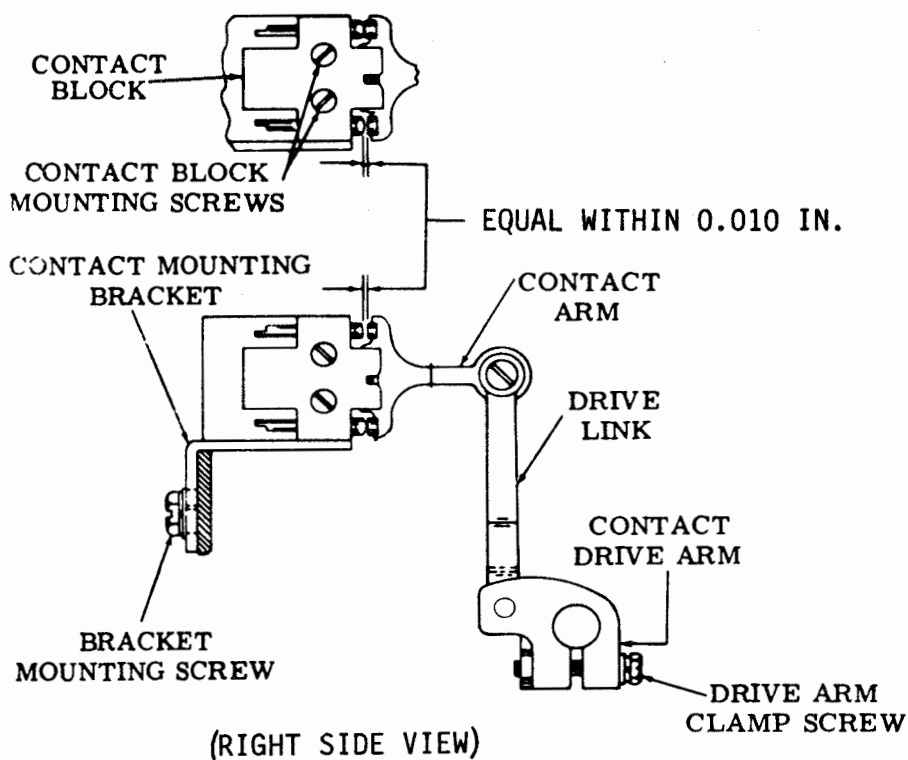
Contact Mounting Bracket, Contact Block, and Contact Drive Arm Position
